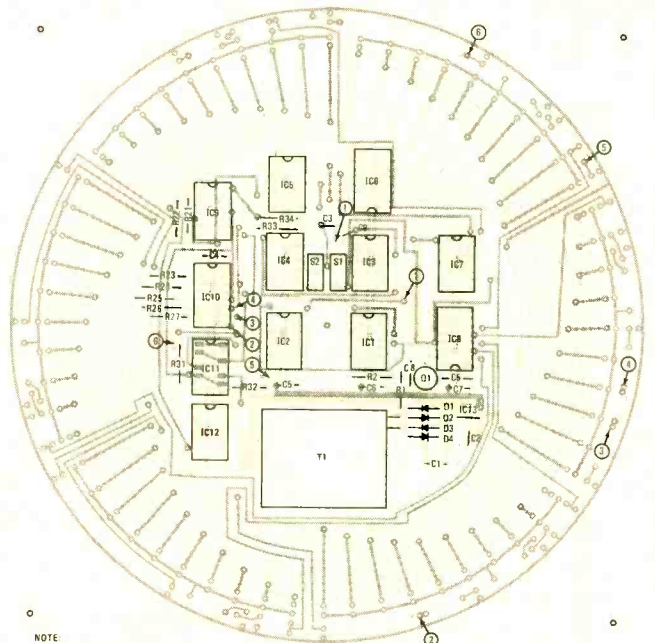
COMPONENT PLACEMENT for rear of PC board.
